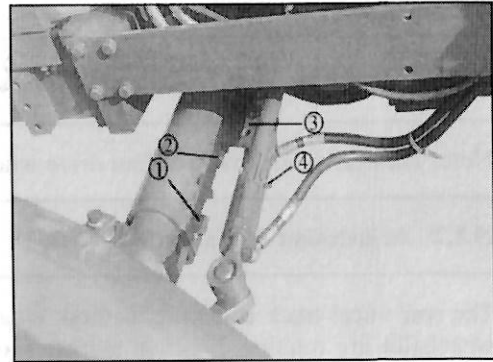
Front wheel track adjustment as to two drive wheel type.
